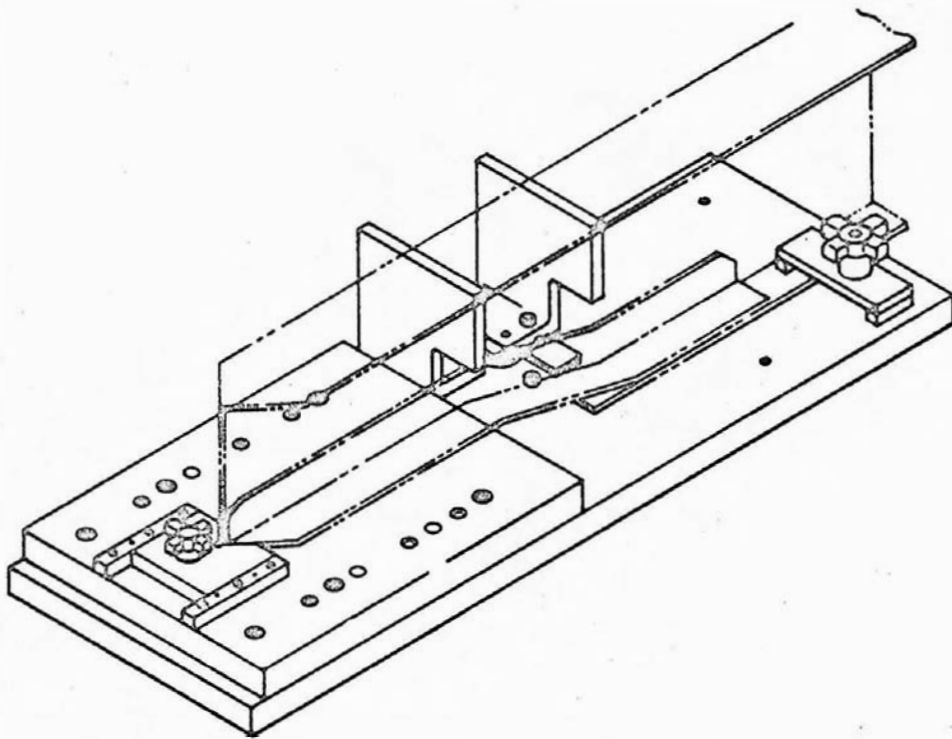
7. Base Heatshield Beam Assembly, Assembly Fixture
